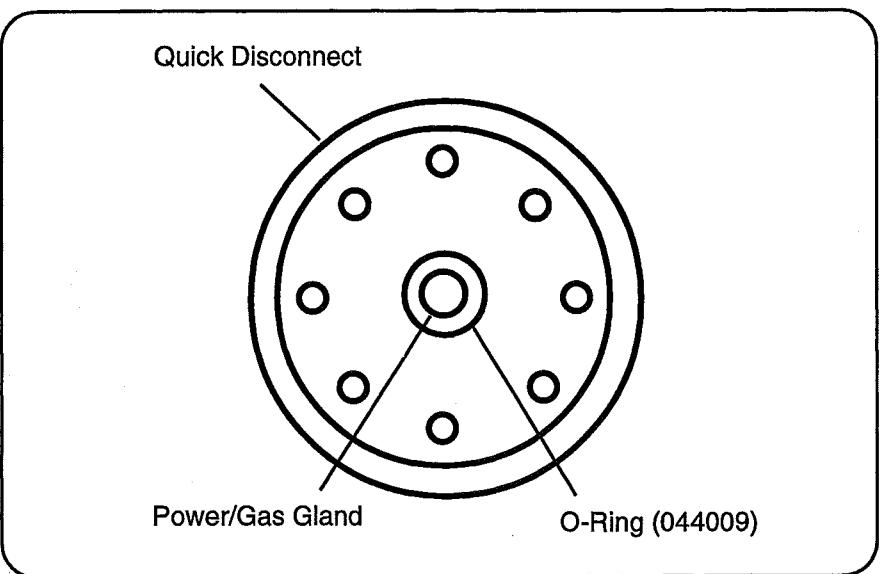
Quick Disconnect O-Ring Removal and Replacement
